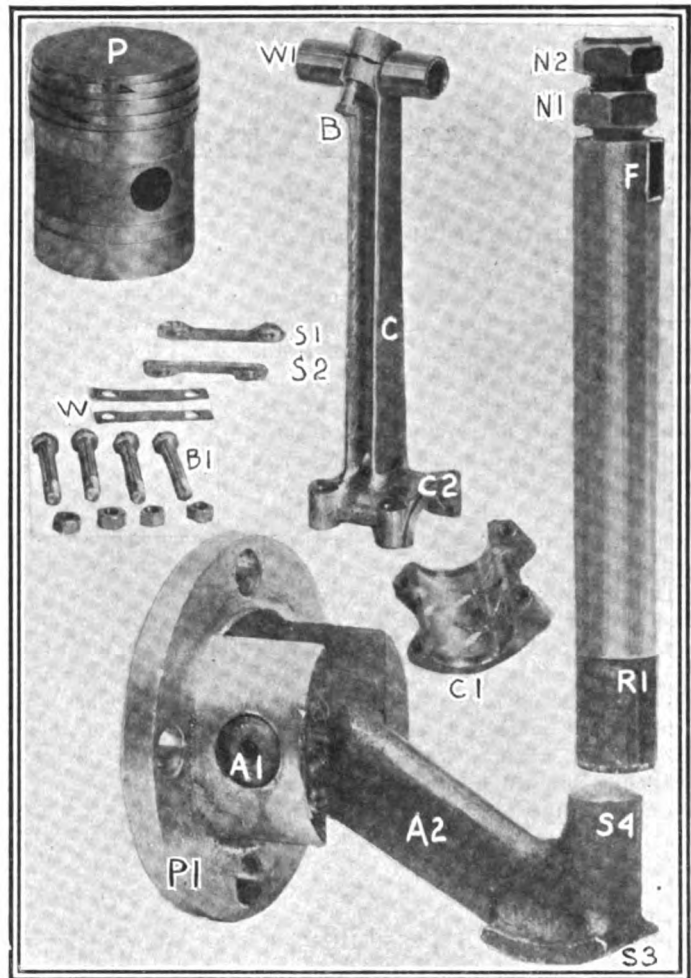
Showing the piston-connecting rod assembly, also valve operating parts
